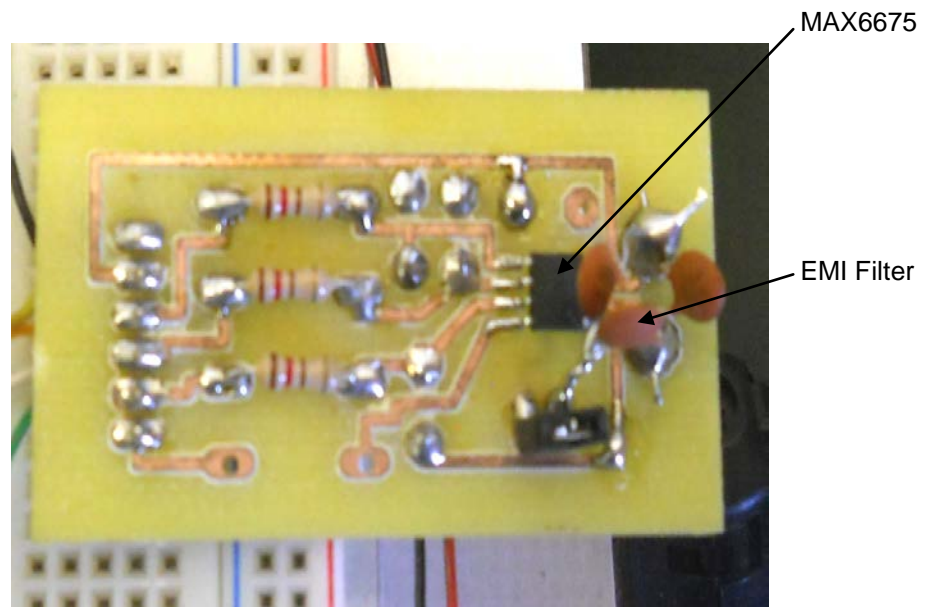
MAX6675 integrated circuit mounted on the prototype board
